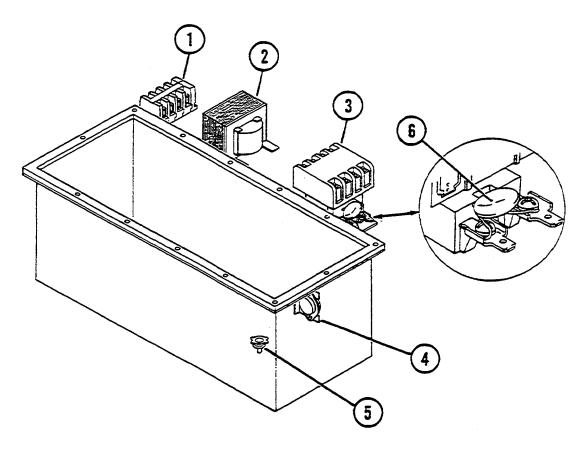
ELECTRICAL COMPONENTS ASSEMBLY
